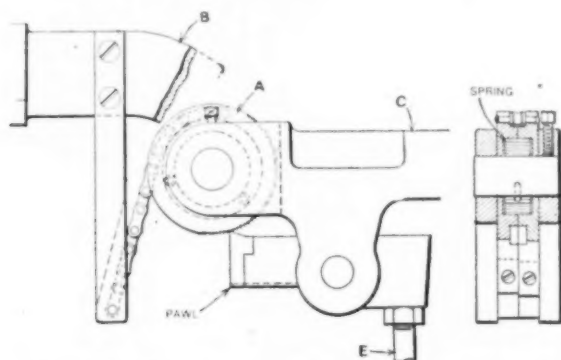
NEW HACK-SAWING MACHINE. GENERAL ARRANGEMENT SHOWING METHOD OF RELIEVING SAW DURING THE FORWARD, NON-CUTTING STROKE
